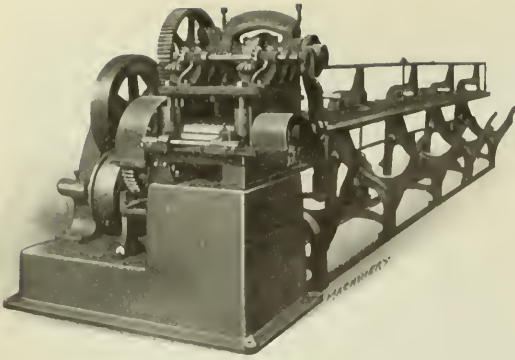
Kane & Roach Automatic Straightening and Shearing Machine
